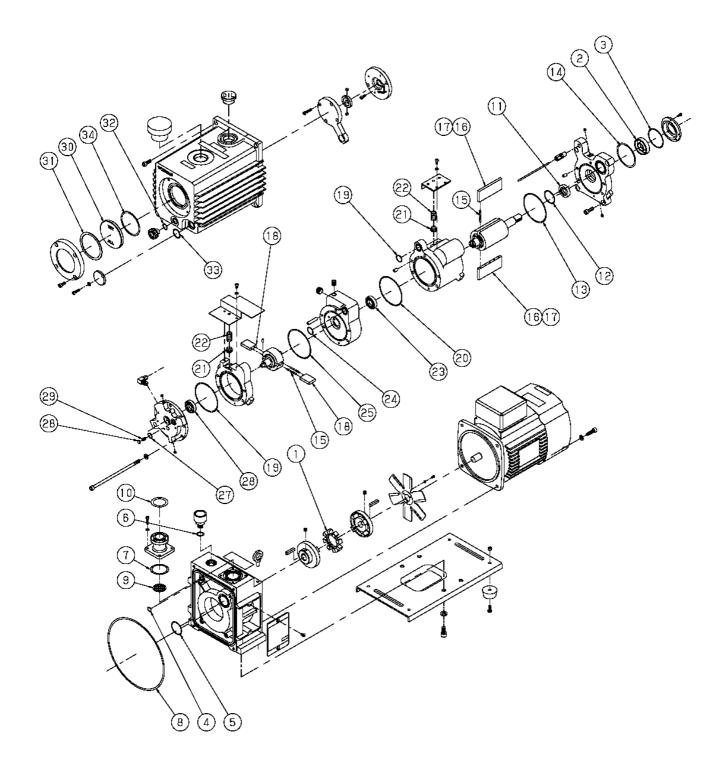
Disassembly drawing of GLD-136A/201A oil sealed rotary vacuum pump
